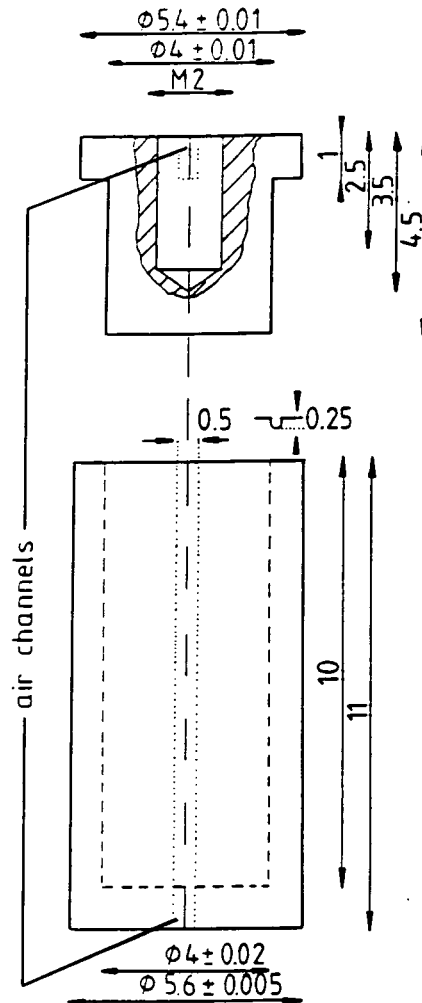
Schematic diagram of the new rotor insert used in double-bearing probes. Dimensions in millimeters.
